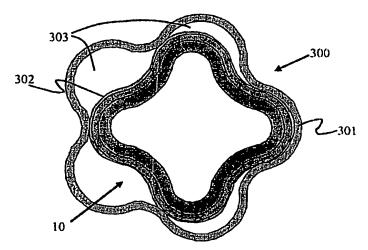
Axial cross-section of thin-walled profiled stator housing with constant elastomer thickness and multi-lobed support housing (4/5 lobe configuration with elastomer-coated primary housing shown).
